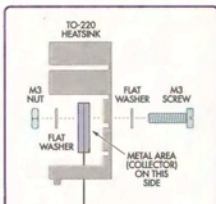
transistors Q4-Q6 must be attached to TO-220 heatsinks as shown here. Insulating pads are not necessary, but you should apply heatsink compound to the mating surfaces.
